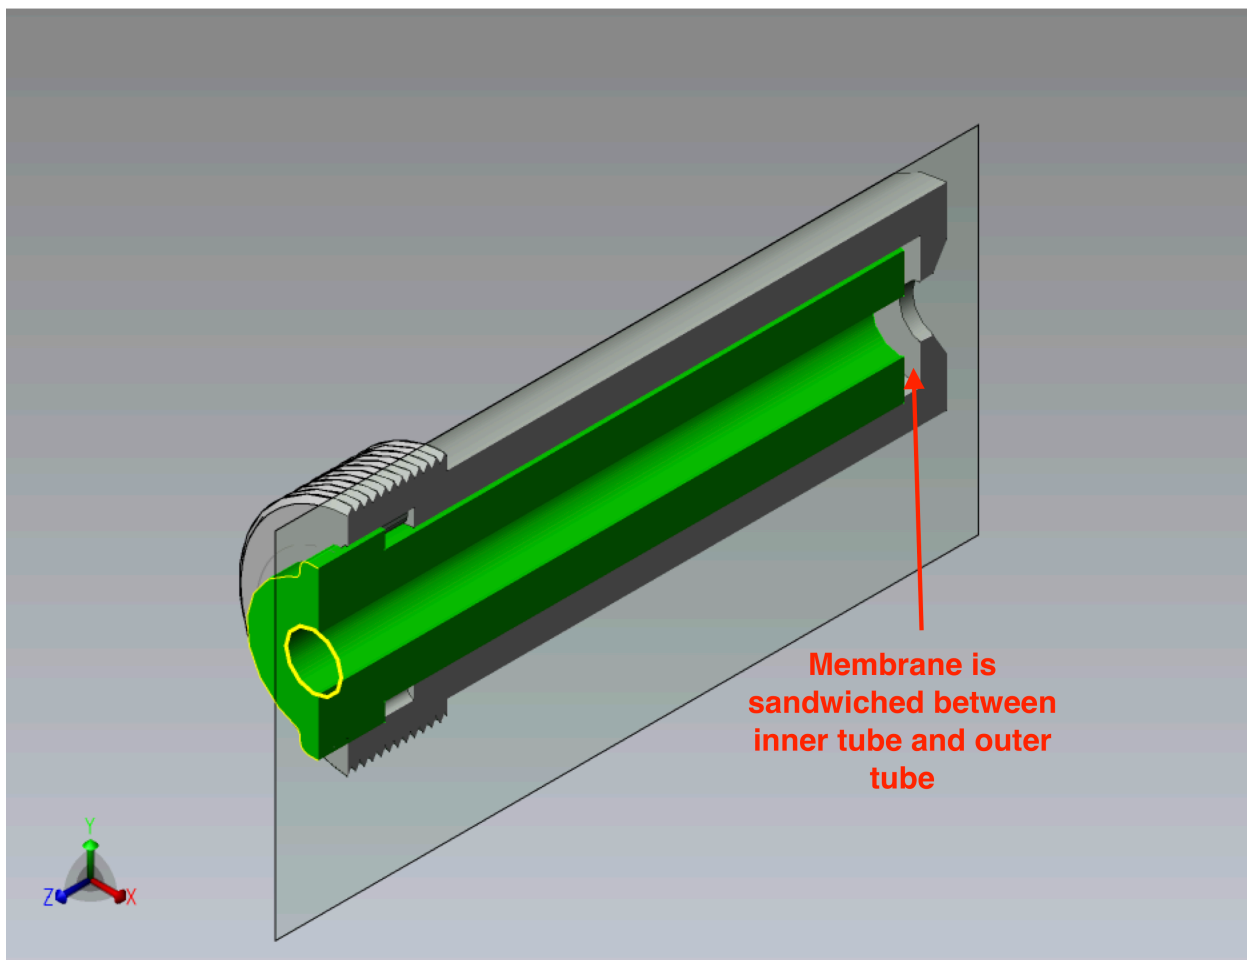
3D view of a cross-section of the inner and outer electrode body pieces, illustrating where the membrane is located.
